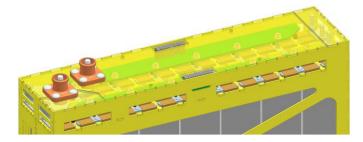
Enclosed battery segment with auxiliary PCB integrated inside.
